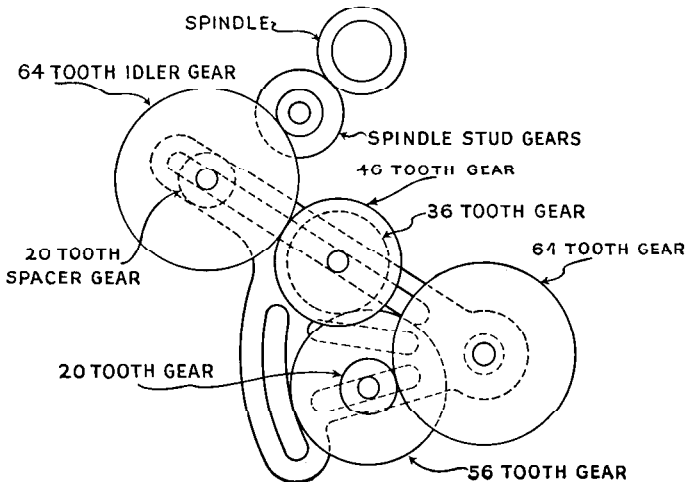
Gear set-up for .0087 inch carriage feed (see page 32).
